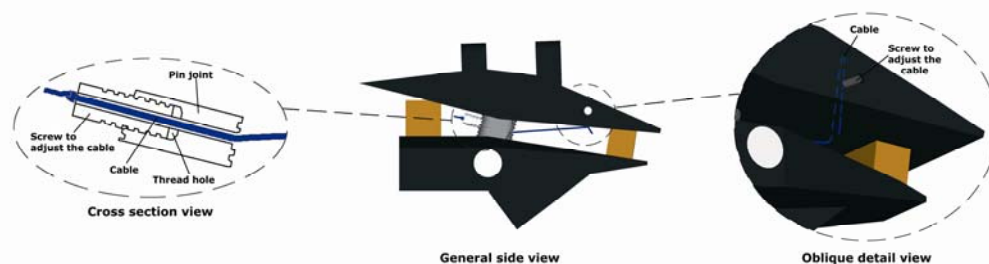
Methods used in the dummy neck to adjust the tension of the cable between C1C2
